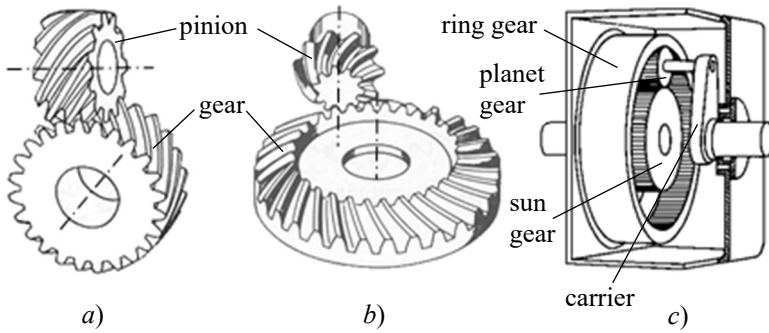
Special designs of gear pairs [1.3 – 1.5]
